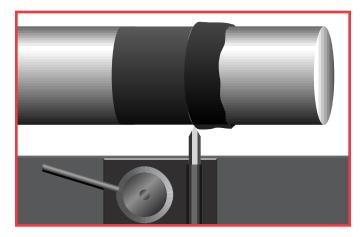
Machine the epoxy to the original dimensions of the shaft.
